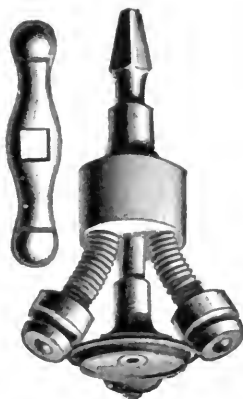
Varnish Can Sealer Used for Crimping Metal Caps.
